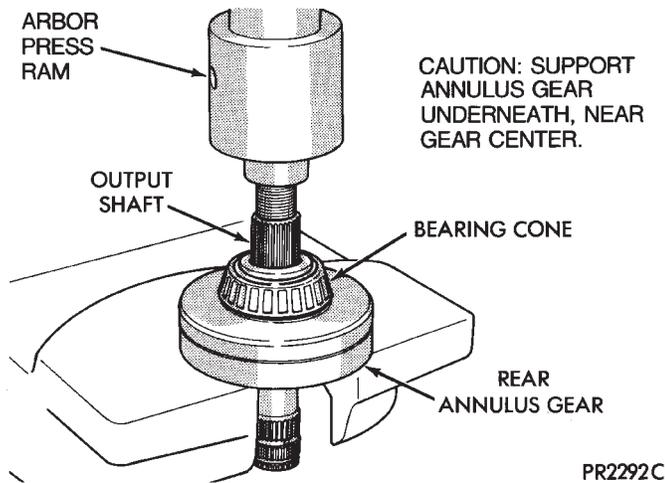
Install Output Shaft Gear Bearing Cone
